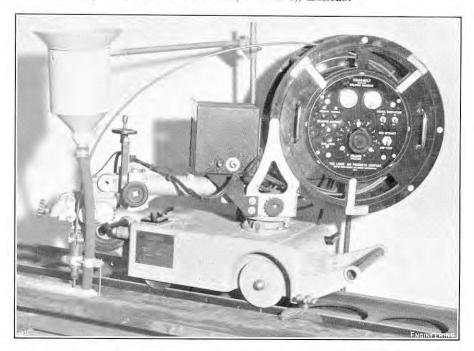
1.200-Ampere "Unionmelt" Welding Head; Quasi-Arc Company, Limited.
